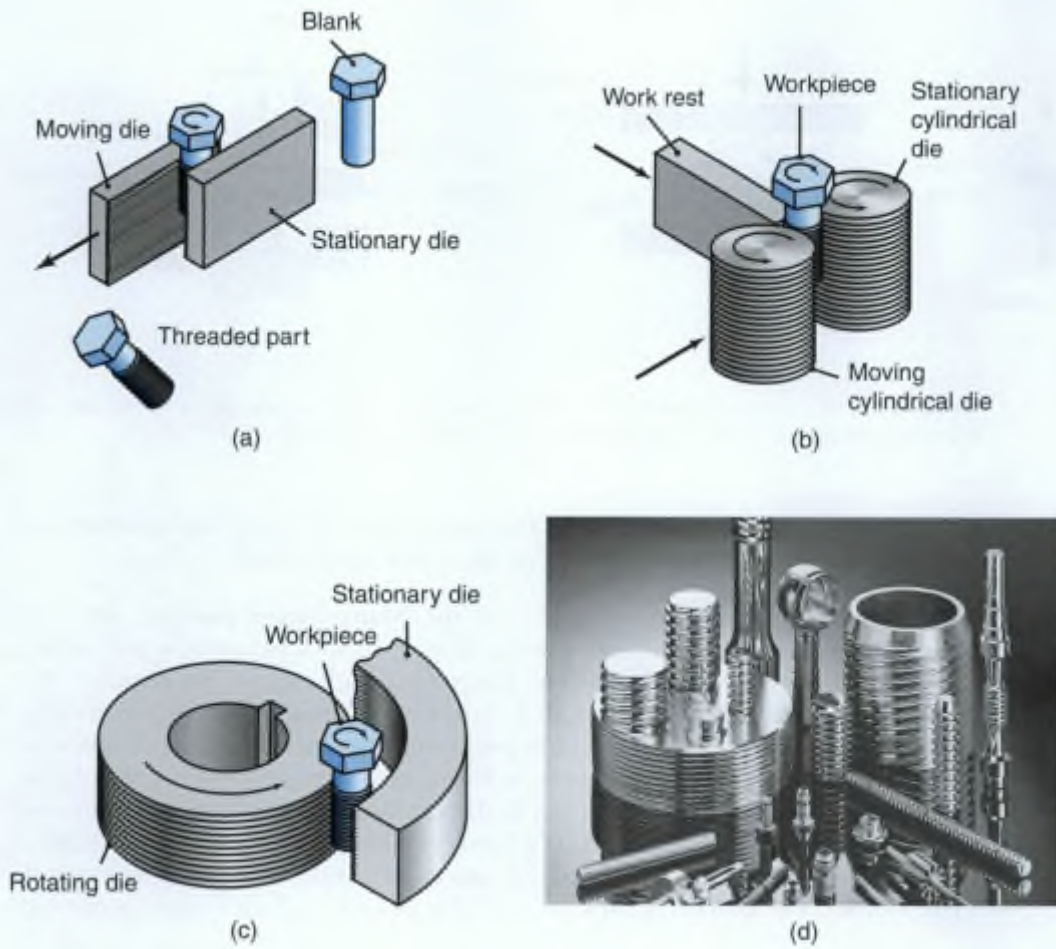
Thread-rolling processes: (a) reciprocating flat dies used to produce a threaded fastener; (b) two-roll dies; (c) rotary or planetary die set; and (d) a collection of thread-rolled parts made economically at high production rates. *Source:* (d) courtesy of Tesker Manufacturing Corp., Saukville, Wisconsin.
